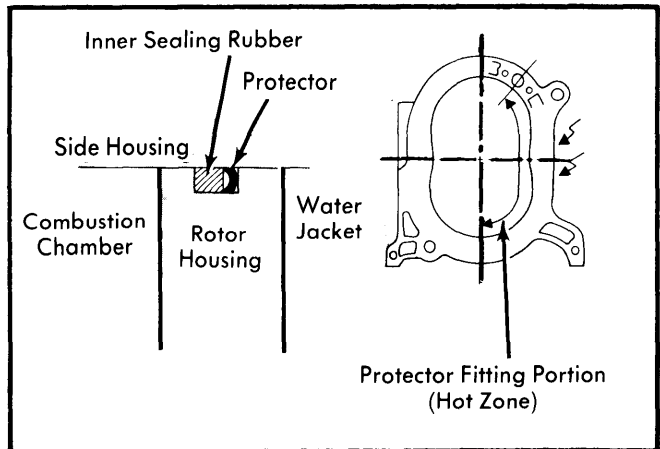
Installing Protectors for Inner Sealing Rubbers
